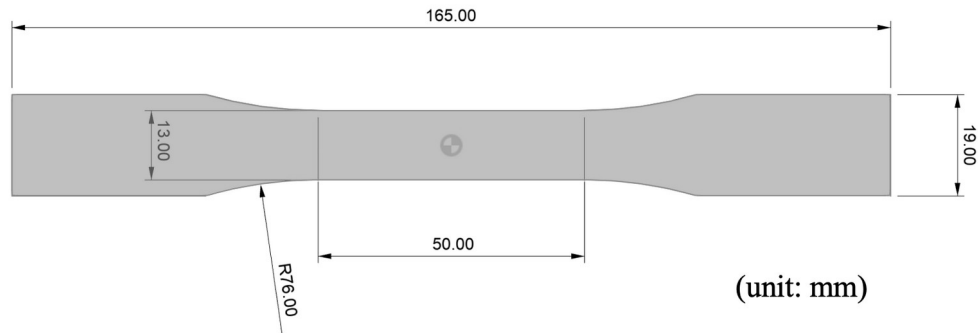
Tensile Testing Coupon per ASTM D638-14 Type I
